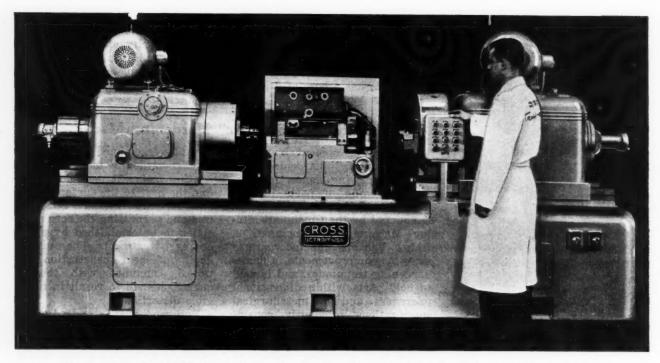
Cross Special Machine Developed to Perform Four Finishing Operations on Cylinder Blocks
